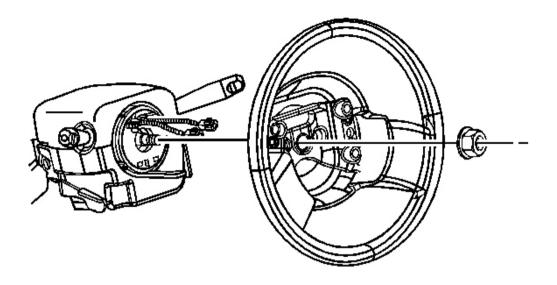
Steering Wheel & Nut Courtesy of GENERAL MOTORS CORP.
